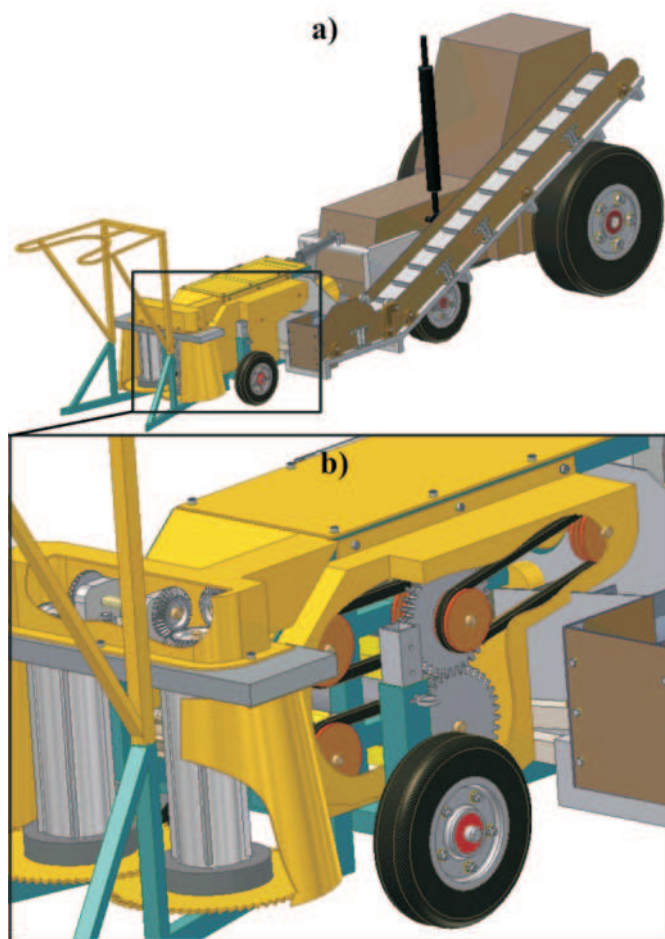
Cutting assembly of wood cutter: 1 - cutting head, 2 - cutter
